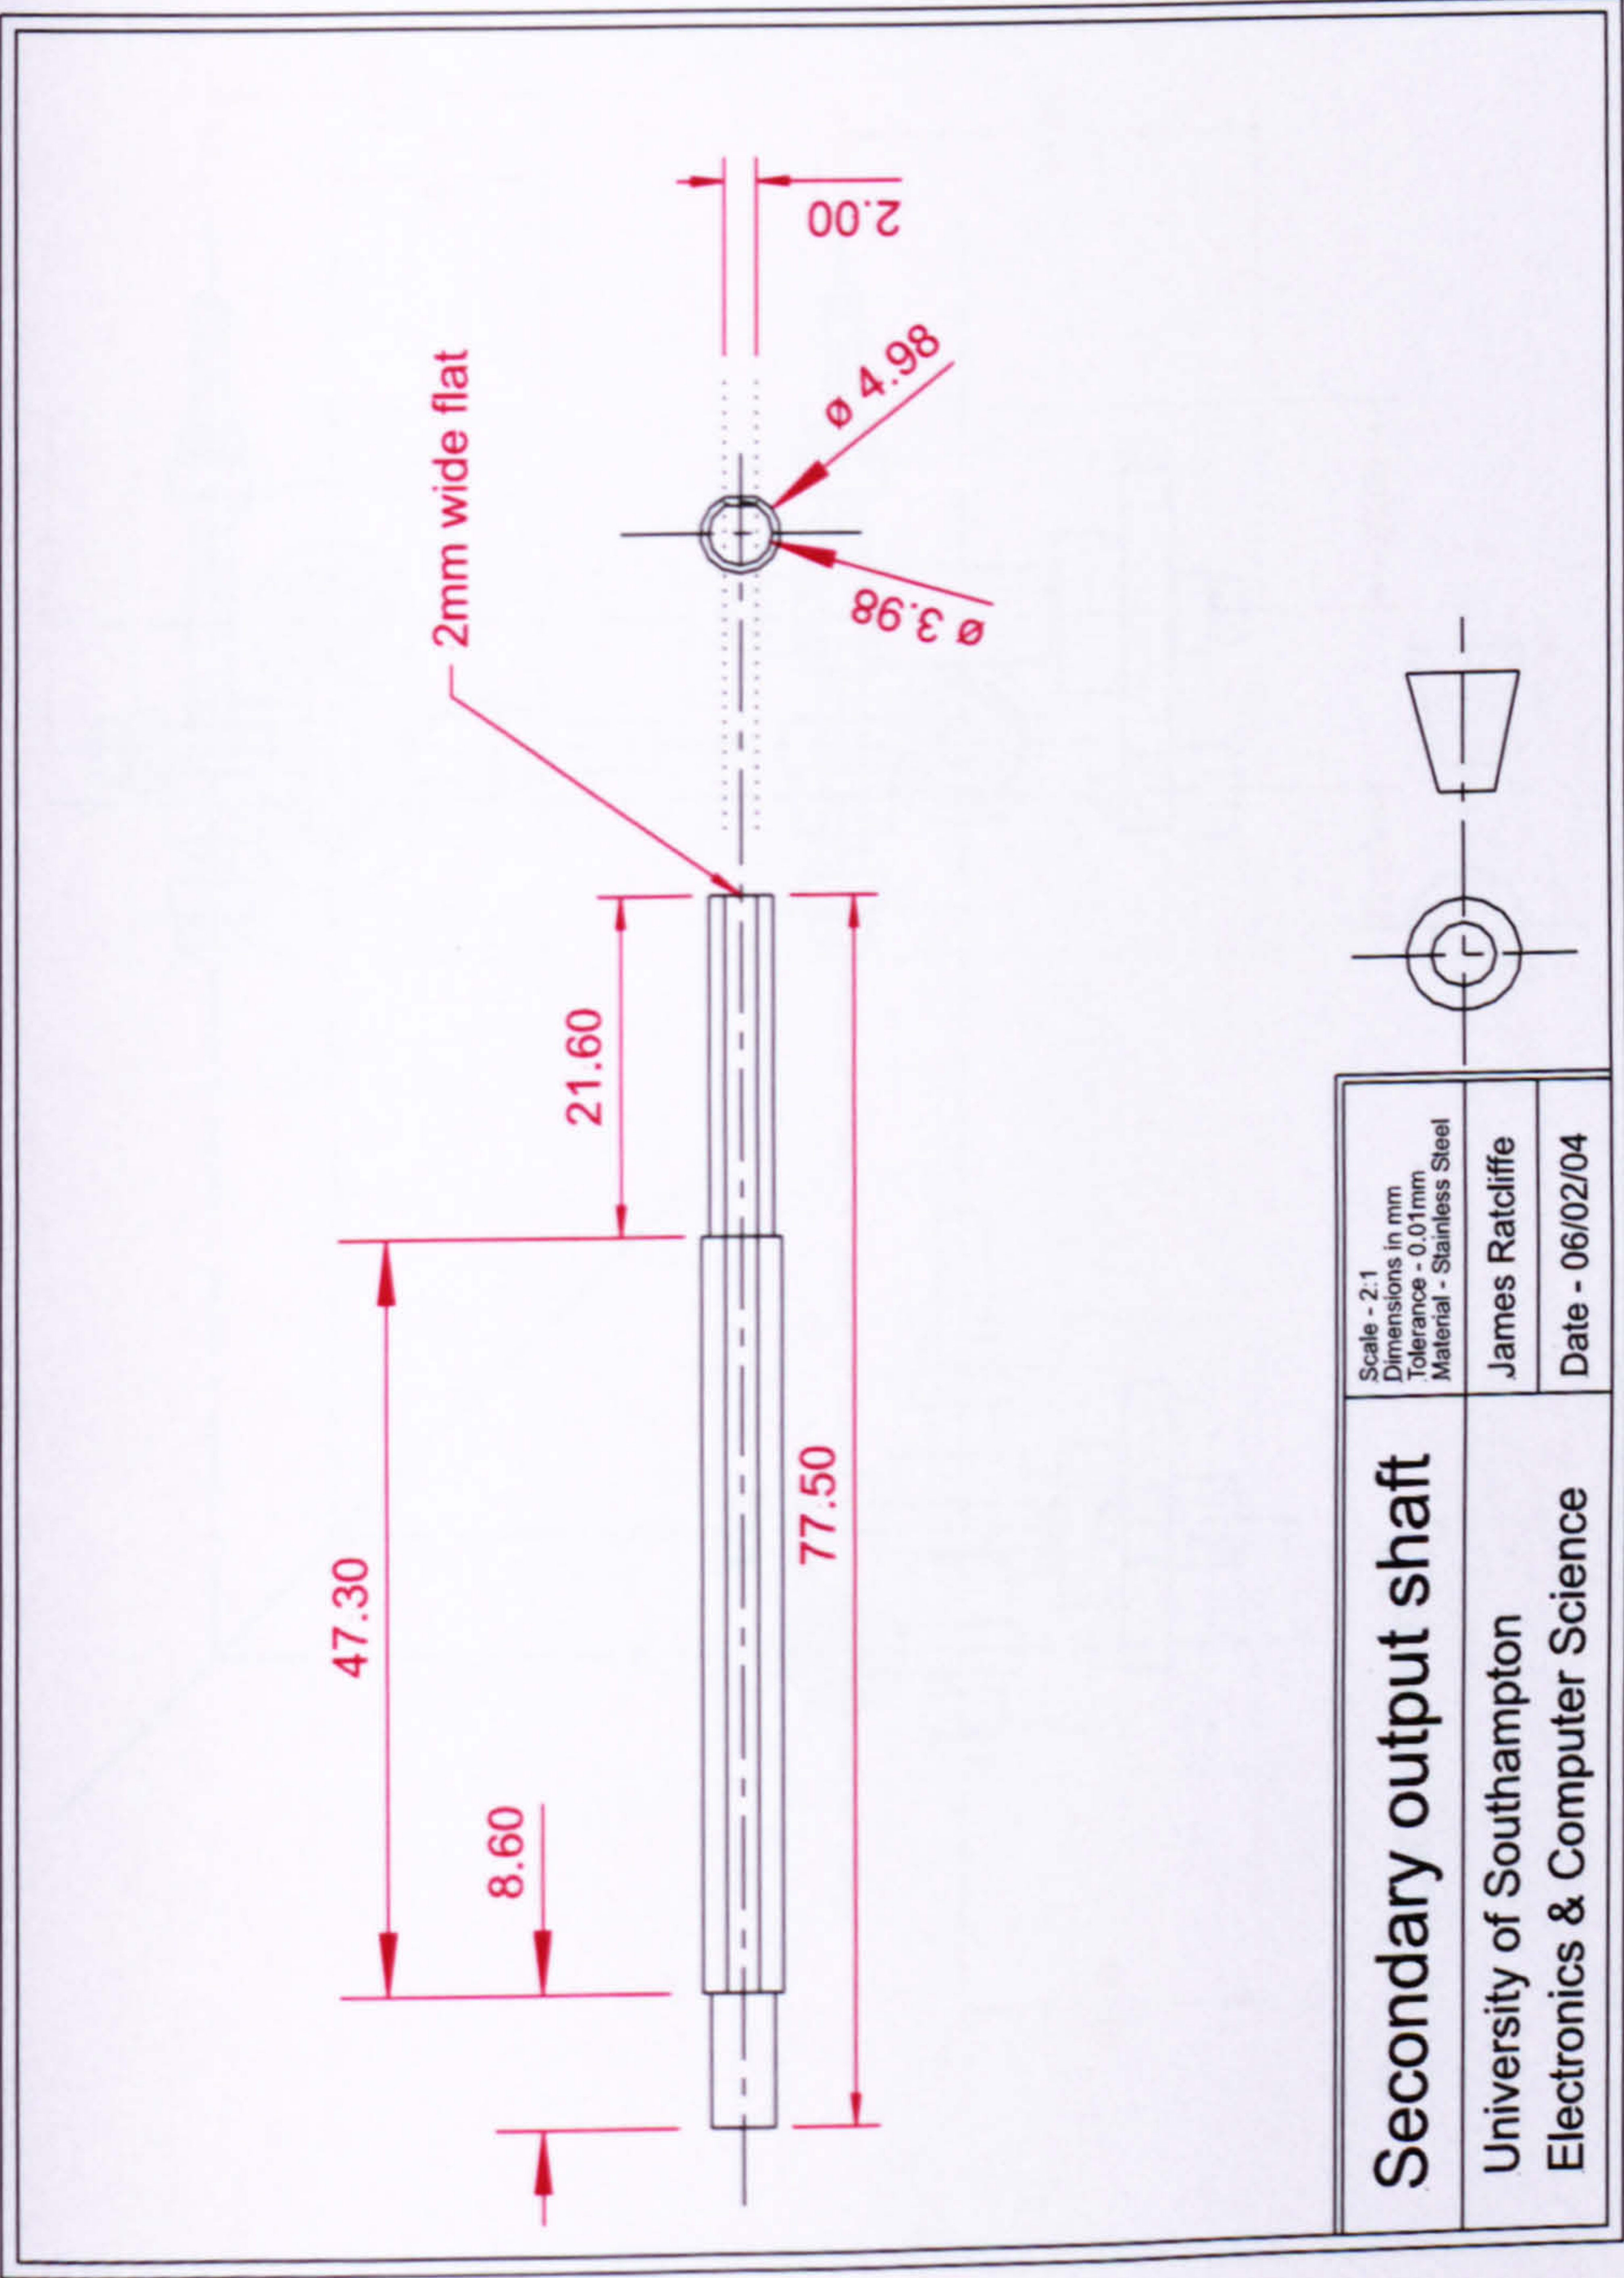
Dispenser gearbox secondary output drive shaft
